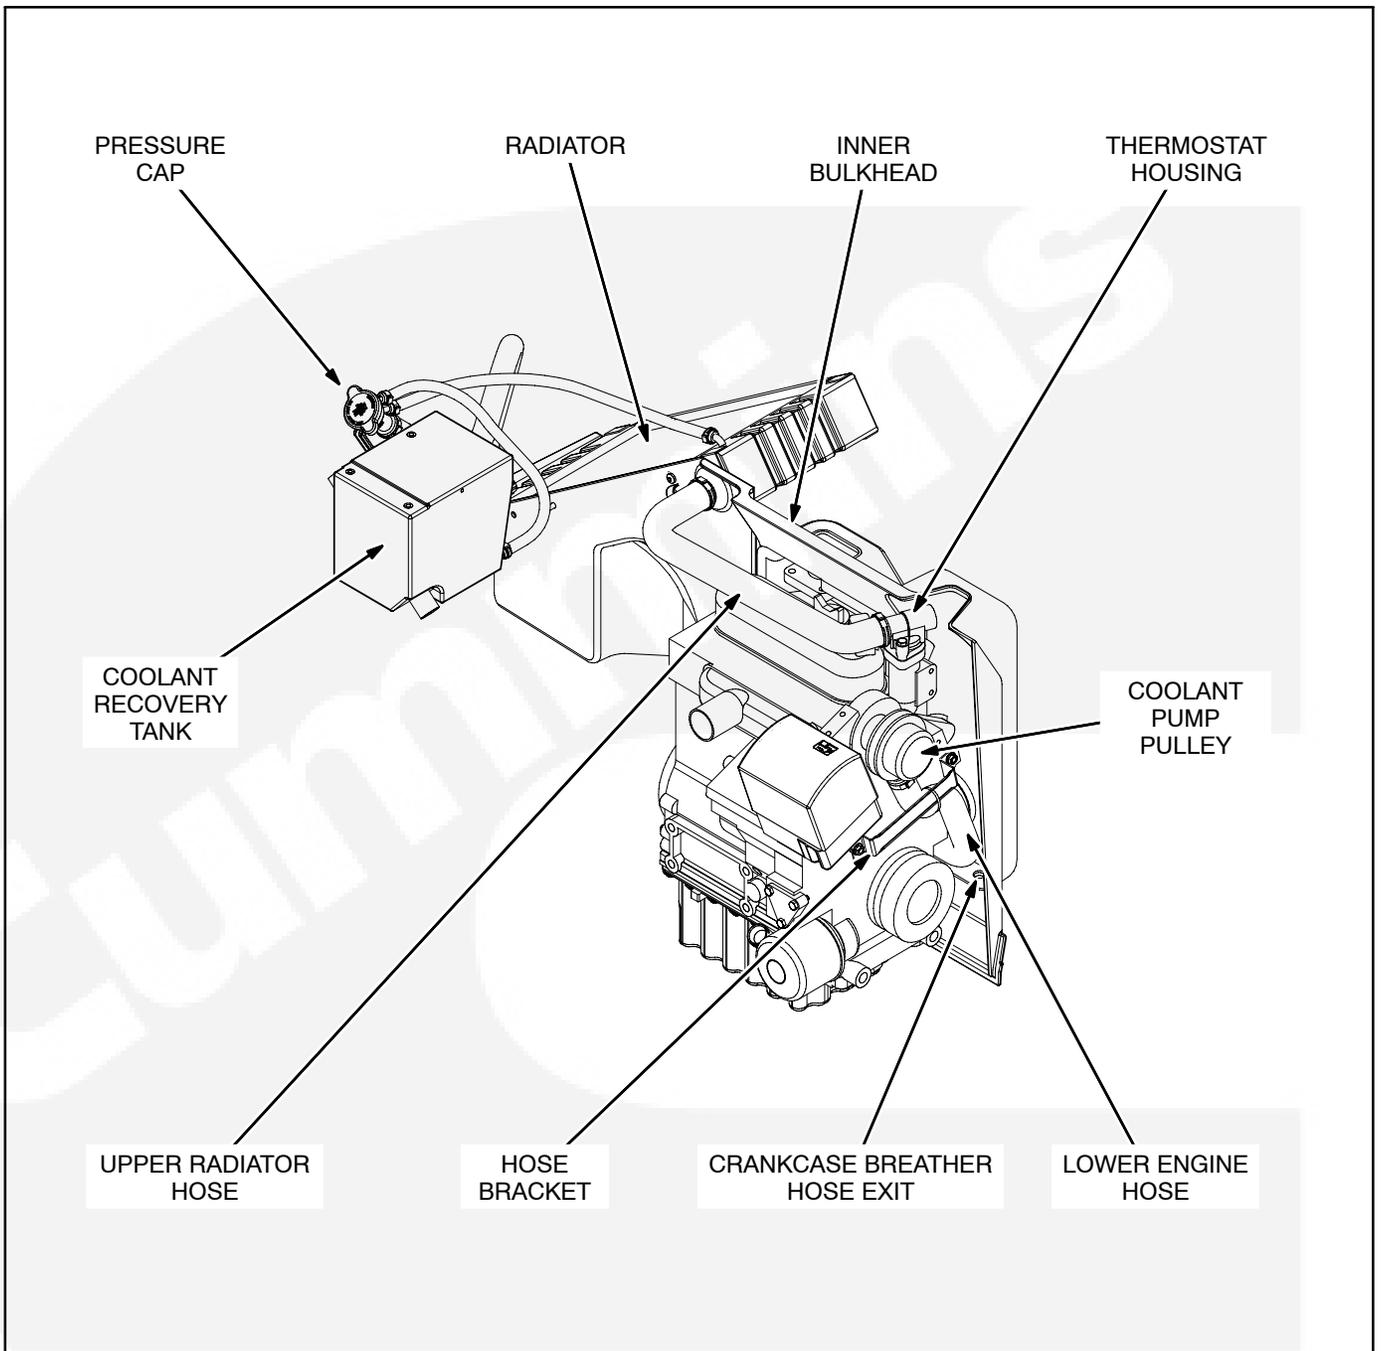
ENGINE COOLING SYSTEM (1 OF 2)
